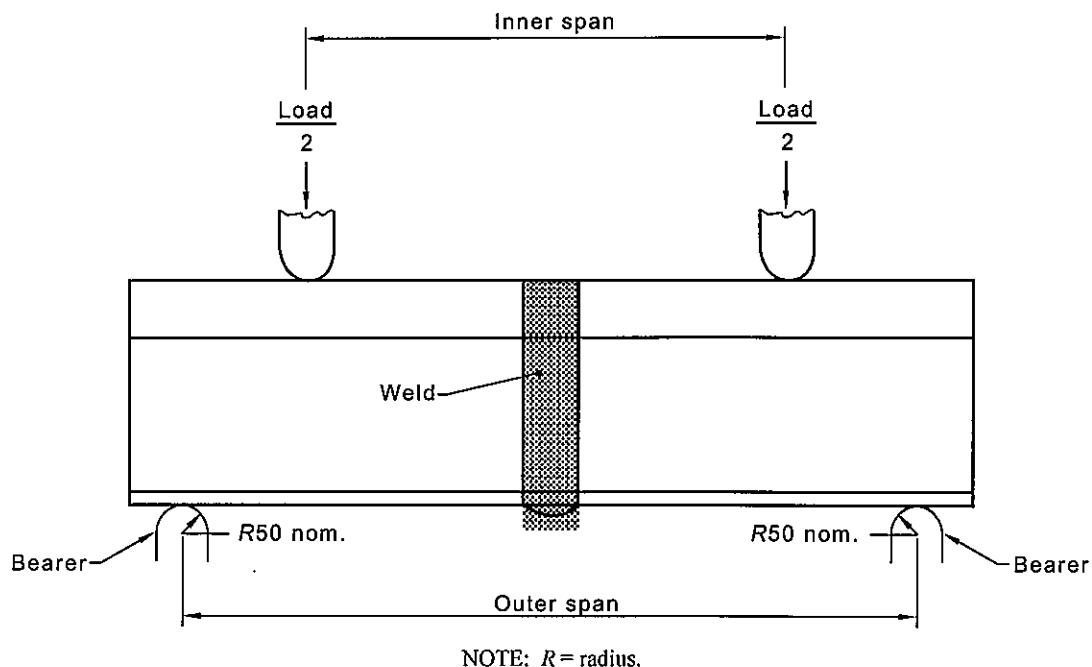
TYPICAL TESTING ASSEMBLY FOR STAIRCASE FATIGUE TEST
